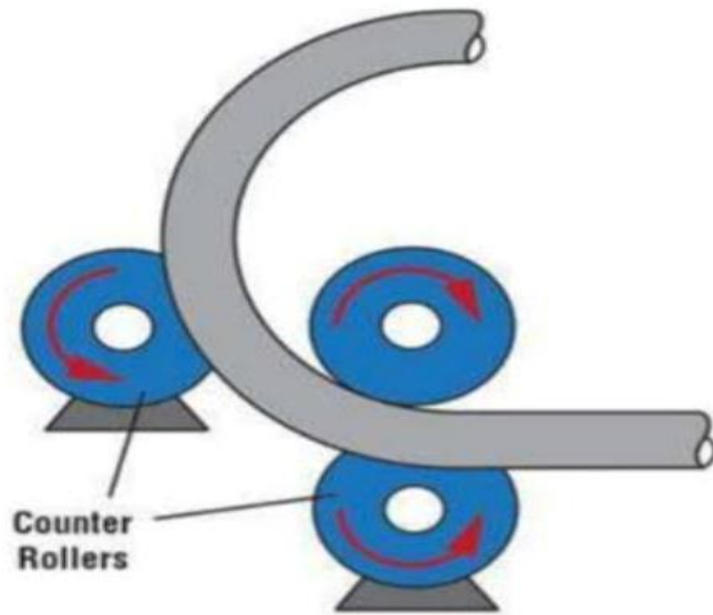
Block diagram of metal bending machine (Ref-6)
